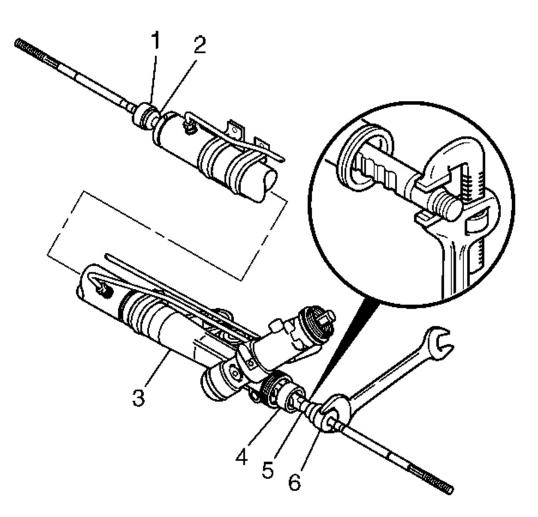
Identifying Inner Tie Rod Components Courtesy of GENERAL MOTORS CORP.
